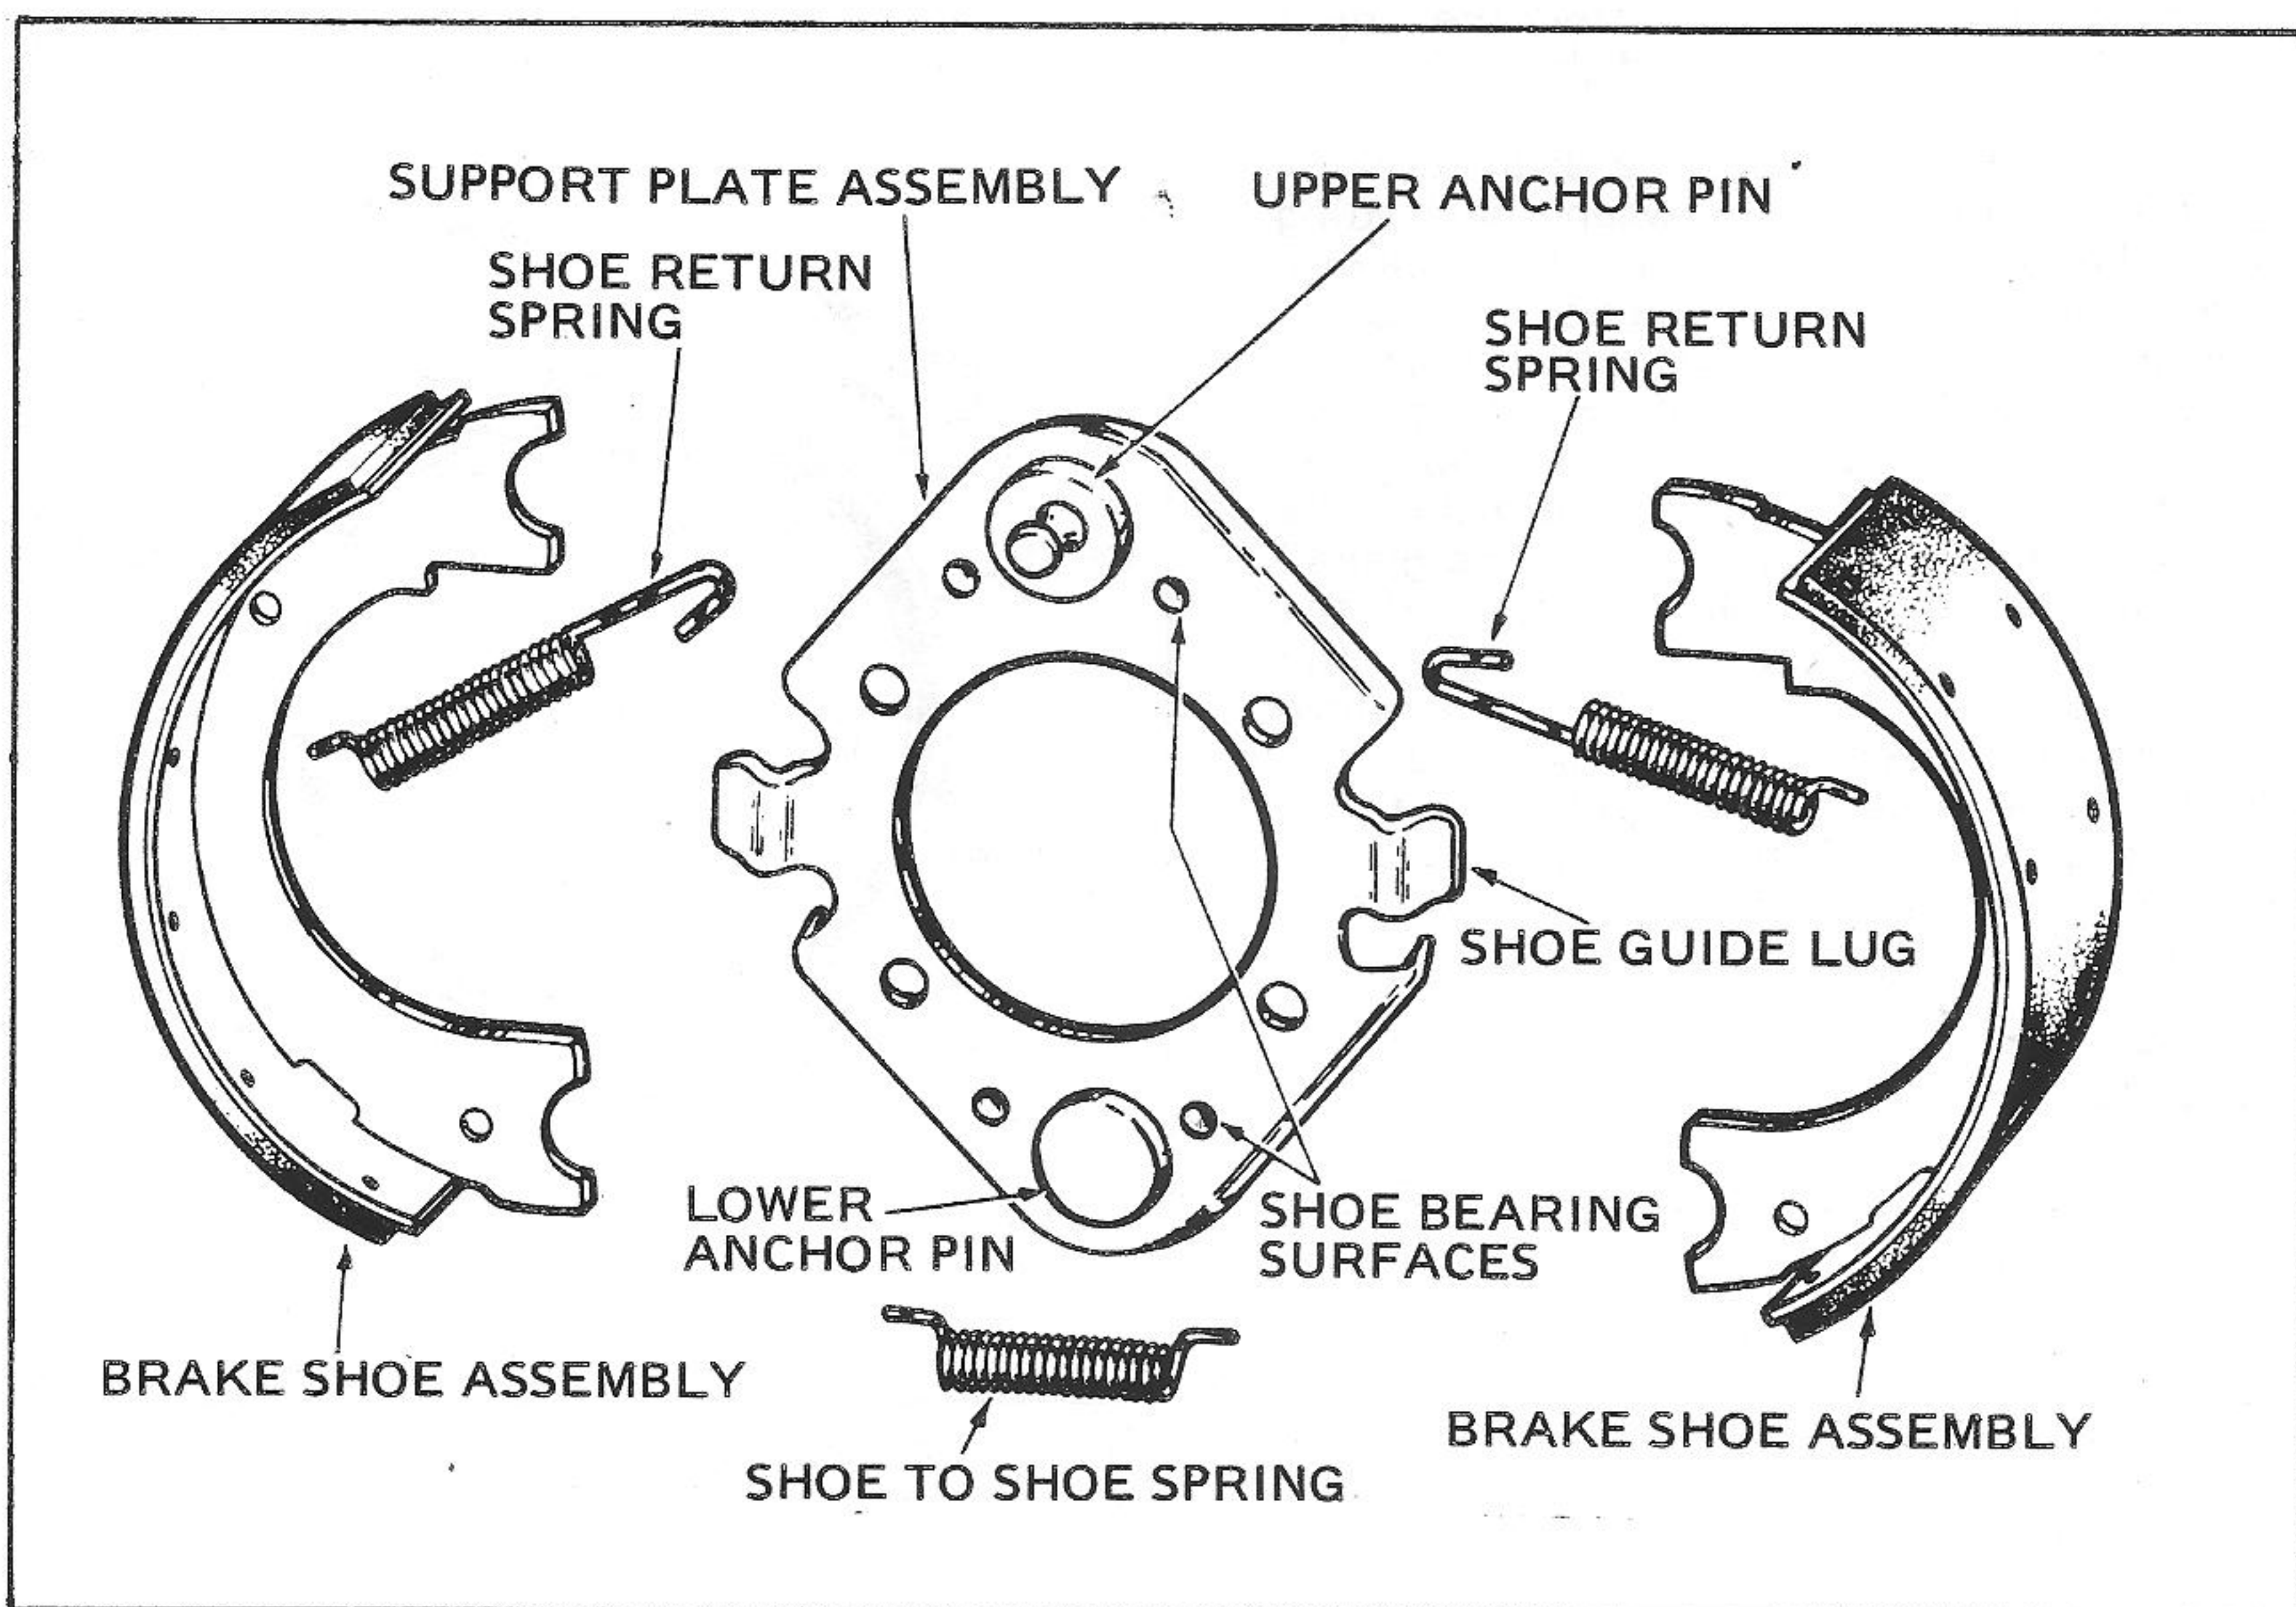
6. PARK BRAKE, LINED SHOE ASSEMBLY
